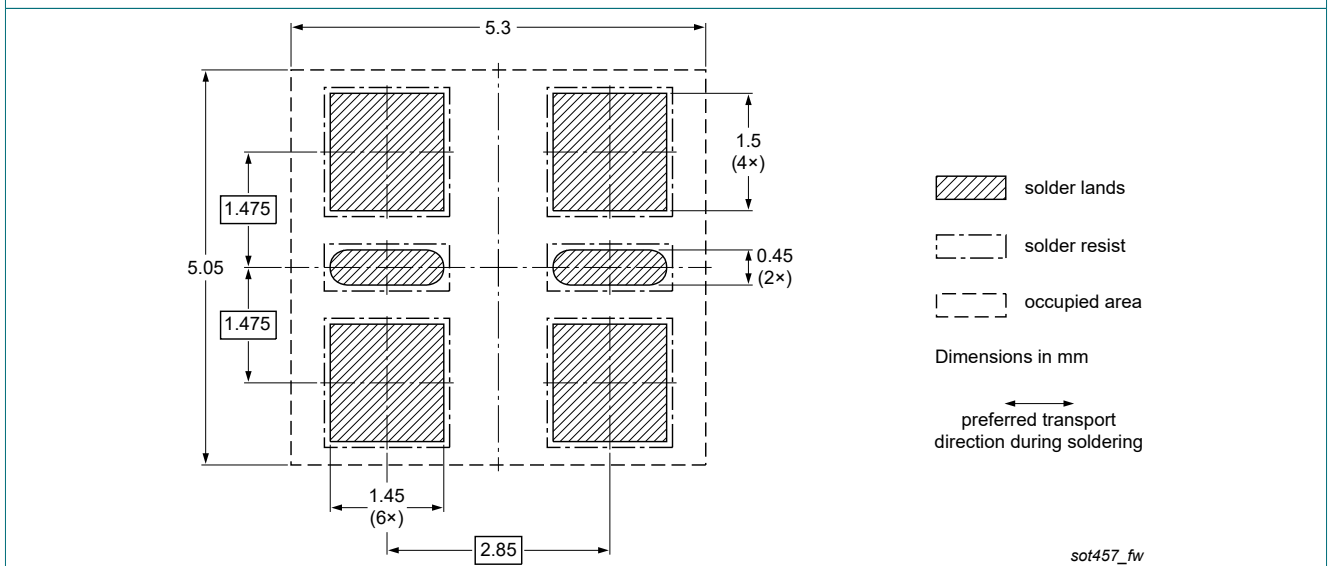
Wave soldering footprint for SC-74; TSOP6 (SOT457)
